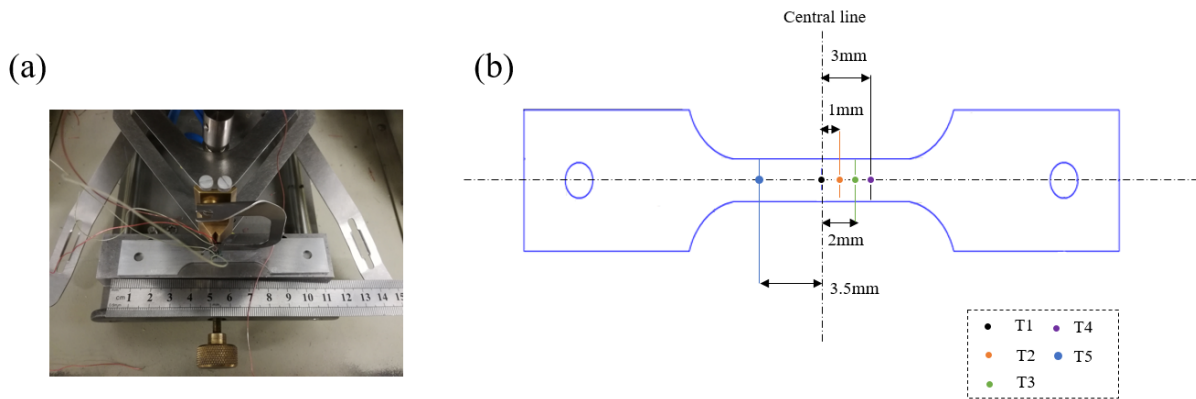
(a) Spot welding on the AA2060 tensile test with thermocouples (b) Positions of temperature measurement on the tensile test specimen
